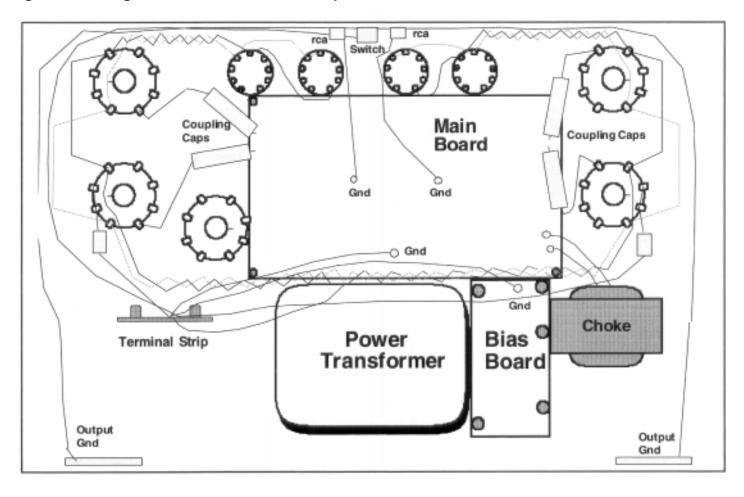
Wiring and Installation Guide Depicts Ground Connections
